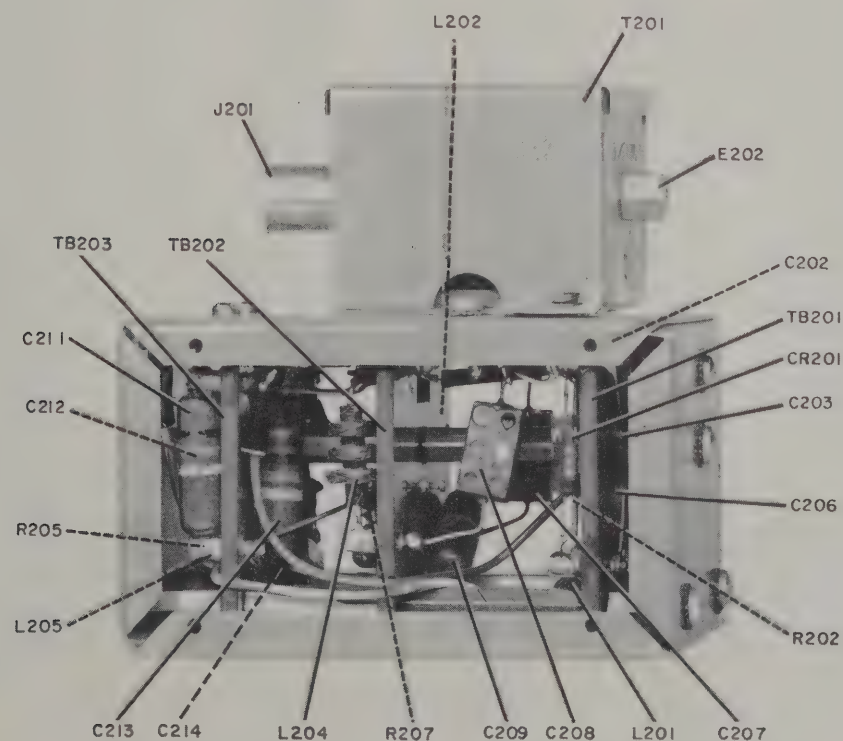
Discriminator Subassembly, Right Side View, Covers Removed
